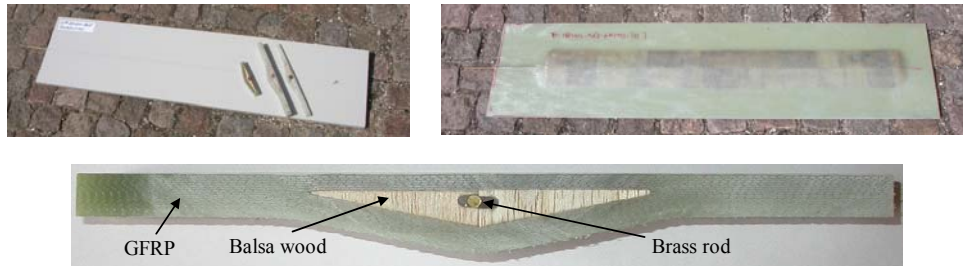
Rectangular test specimen for measuring the electrical breakdown field strength, Upper left: Front side of specimen and cross sections, Upper right: Back side of specimen, Bottom: Cross section perpendicular to the length of the specimen.
